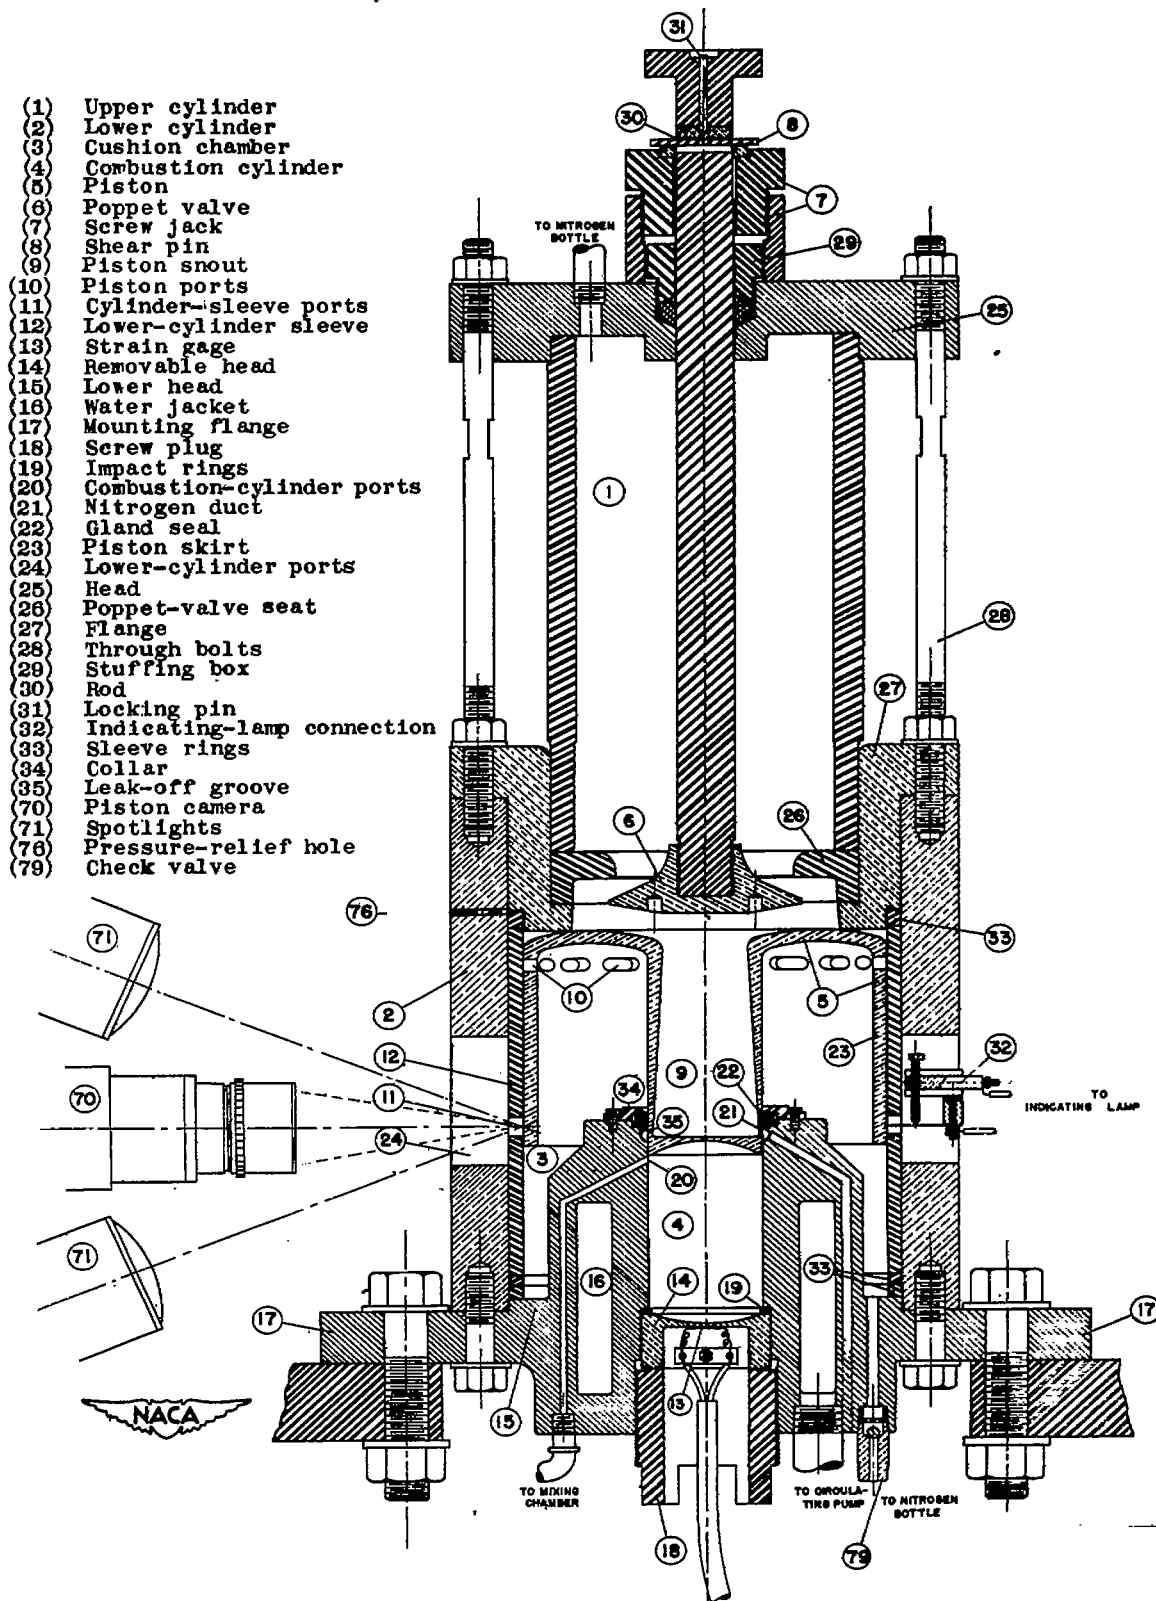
Sectional view of the M.I.T. rapid compression machine.
